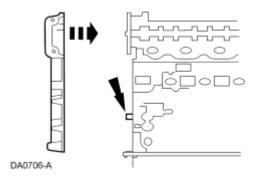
Installing Engine Front Cover Gasket Courtesy of FORD MOTOR CO.
